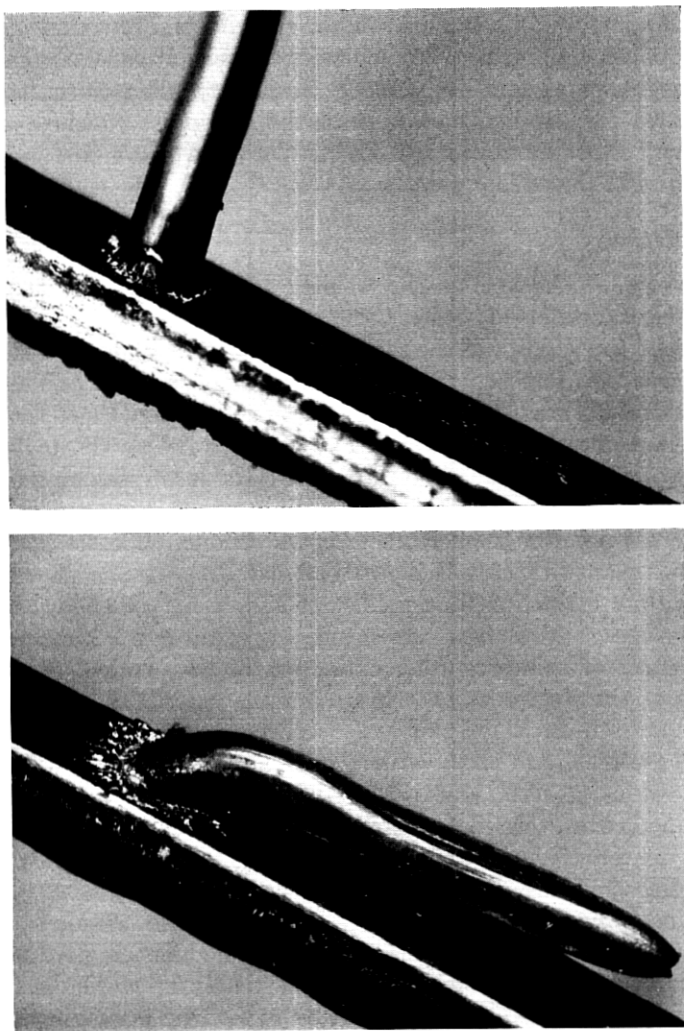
Photographs of sound welds, as made (top) and after a destructive test in which the wire broke (bottom).
